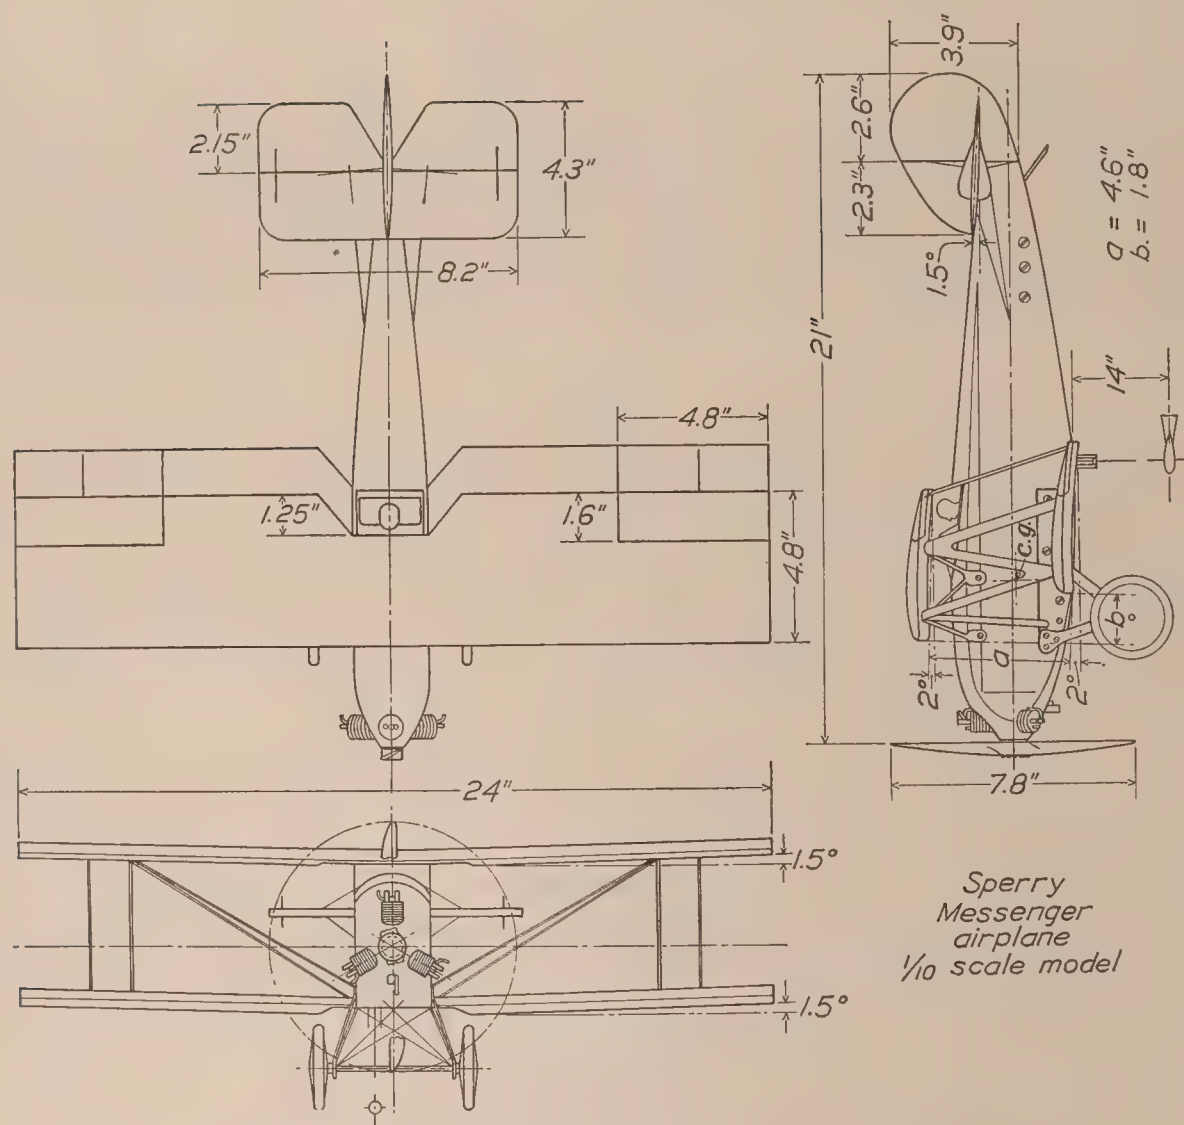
Plan, elevations, and dimensions of the Sperry Messenger model
